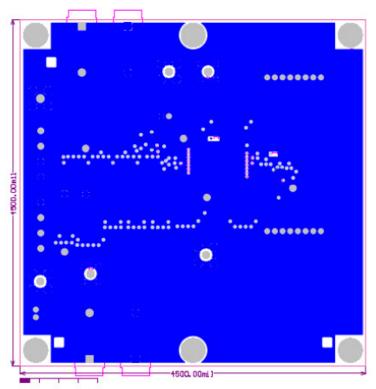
Board Layout - Third Layer (Mid Layer 2)
